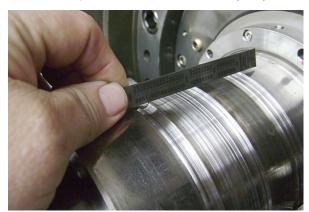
Wire Wooling on a Compressor Shaft Journal.
